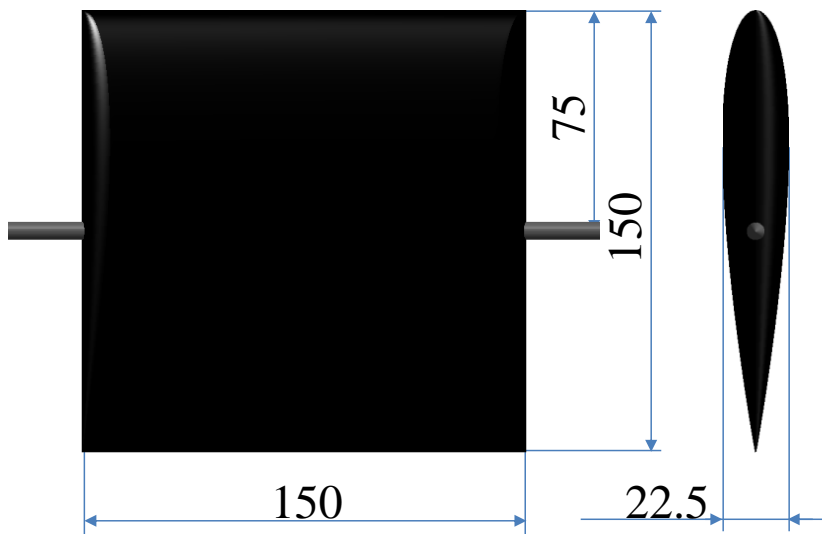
Rectangular airfoil dimensions (mm)
